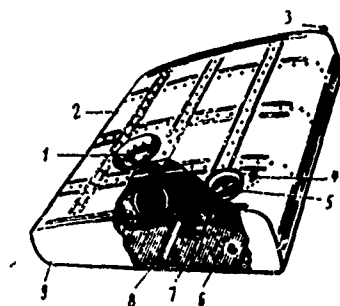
Fuel tank (right group): 1 - fuel gauge neck; 2 - shell; 3 - connecting fitting for servicing from BPK-4 pump; 4 - drain fitting; 5 - filler neck; 6 - gauze filter; 7 - partition; 8 - stiffening section; 9 - bottom.
